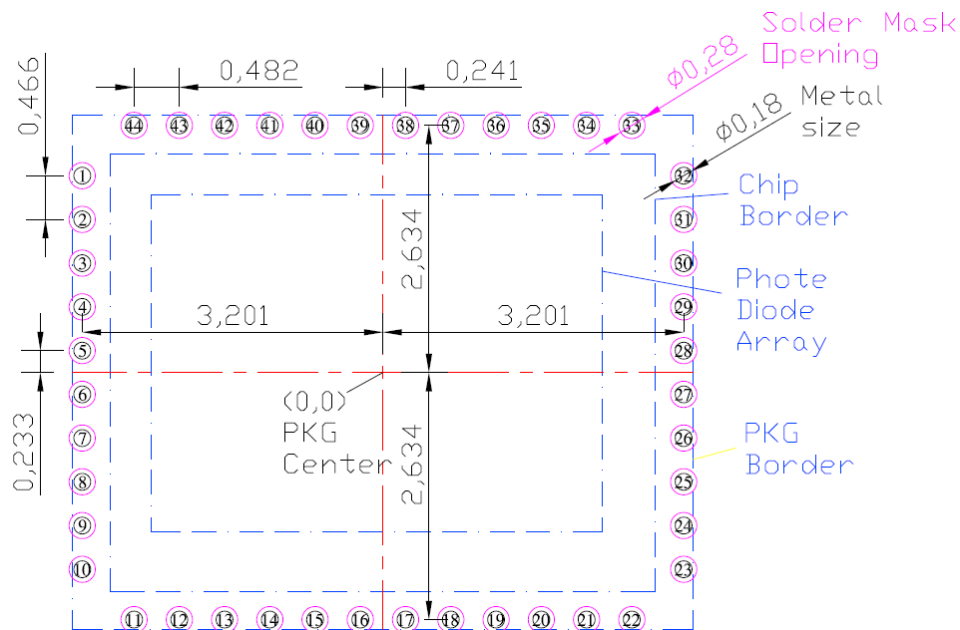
Recommended PCB land pattern (dimensions in mm), Pixel (0,0) is located on the top right corner of the pixel array here, close to pin 31.
